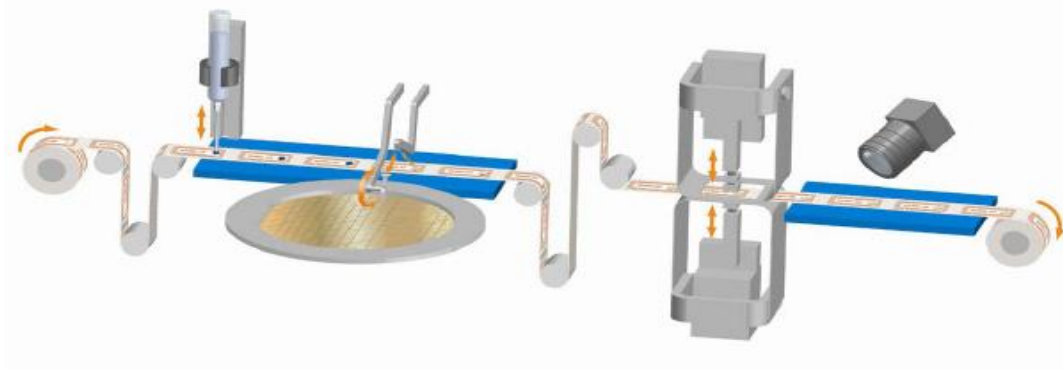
The roll-to-roll manufacturing technology for RFID tags fabrication.
